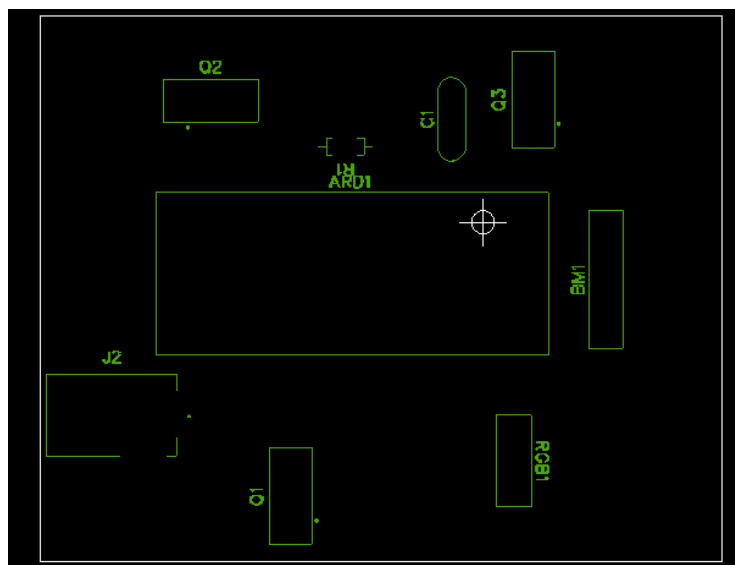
Image showing the rectangular dimensions of the PCB.
